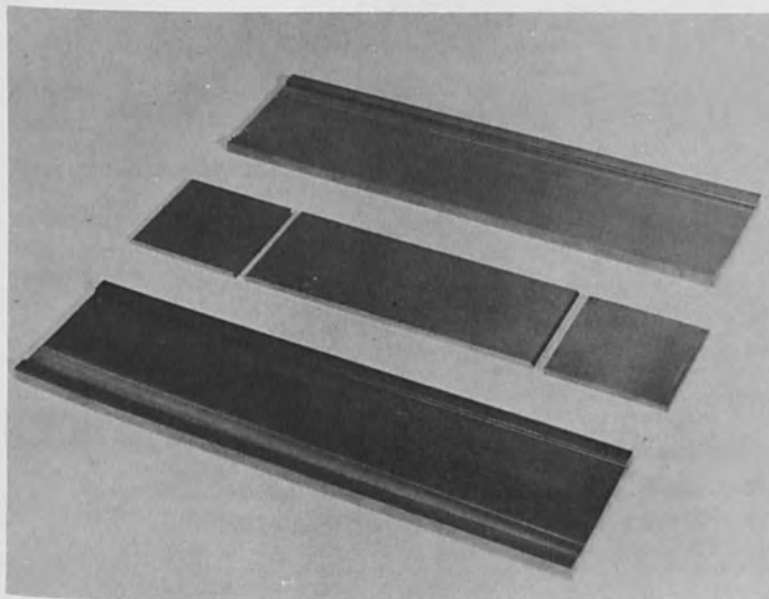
PARTS OF PLATE FUEL ELEMENT BEFORE WELDING AND ROLLING. FUEL AND ZIRCALOY CAPS IN THE CENTER. HALF PARTS OF CAN ON EACH SIDE. HALF PART OF CAN IS OBTAINED BY EXTRUSION (INCLUDING THE THICK PART OF THE SIDE).
